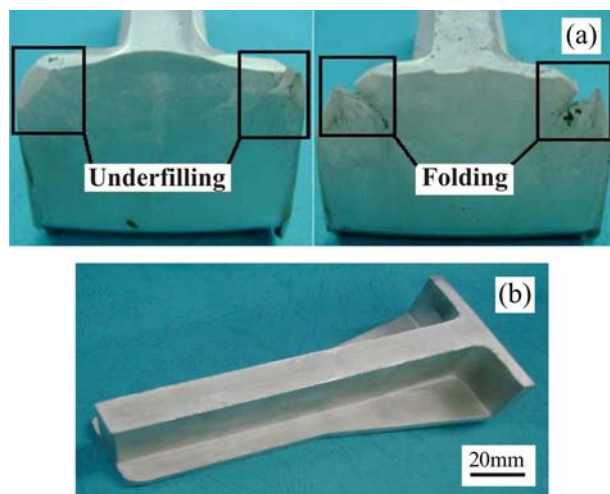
Forgings and defect photos: (a) typical defects, (b) good forming workpiece.
